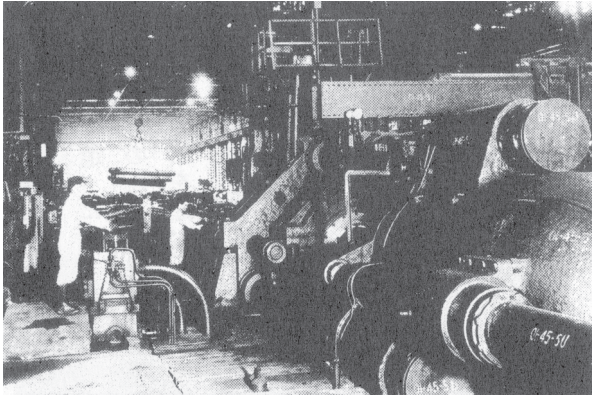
3600-Ton Horizontal Hydraulic Extrusion Press²
